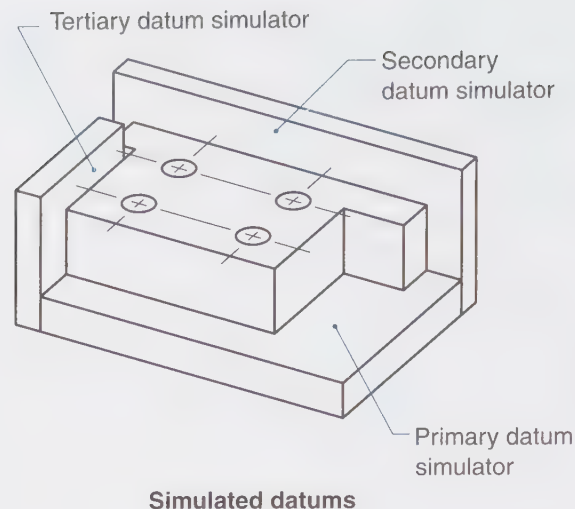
Three flat tooling surfaces may be used to simulate the datum reference frame that is created by three datum feature surfaces.
